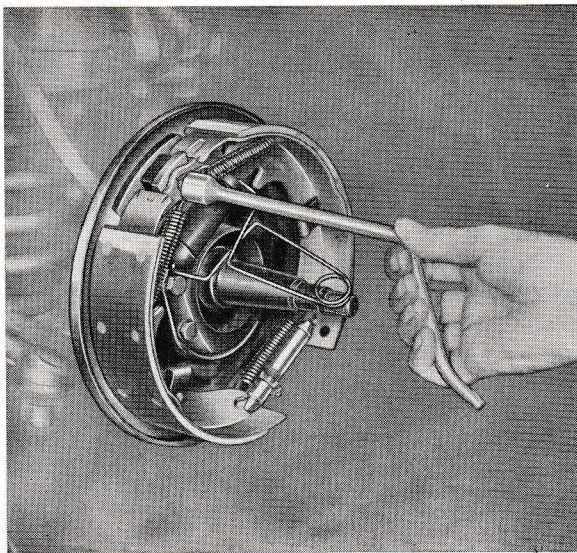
Removing the return spring with brake spring tool (Snap-on BT 11 or corresponding).
